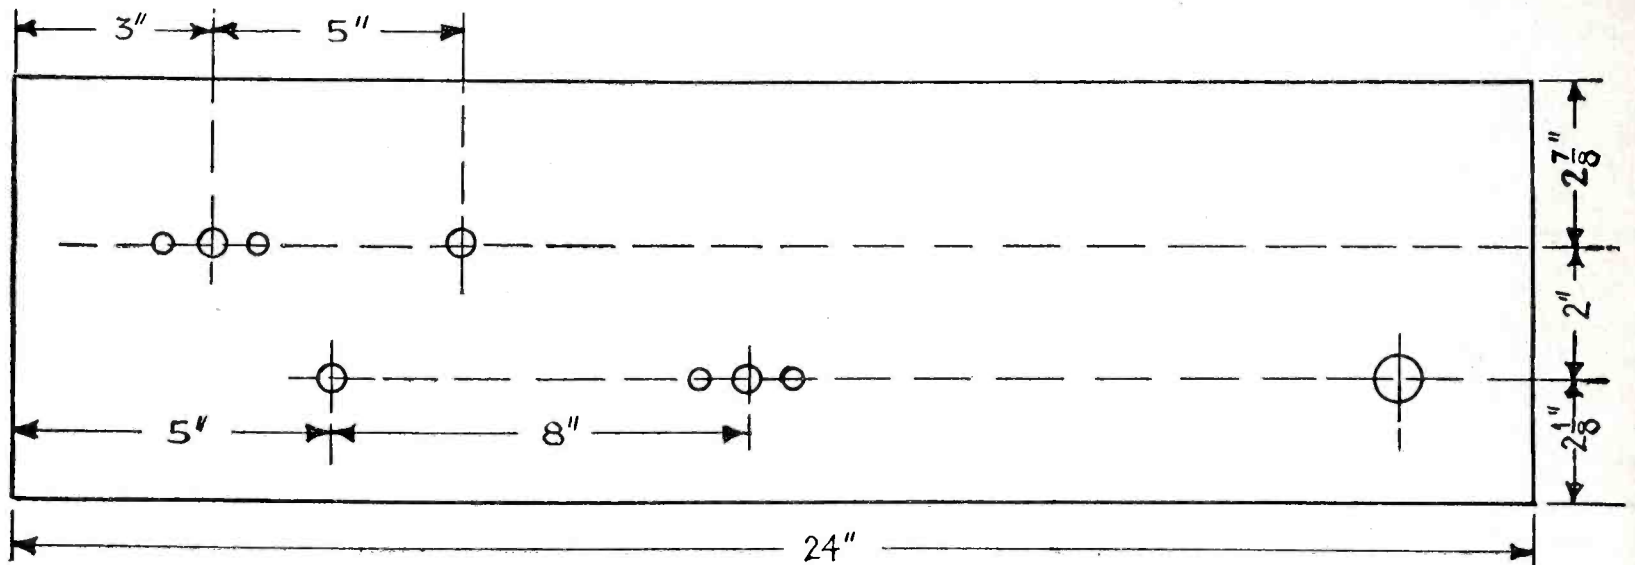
Suggestive layout for panel showing exact location of holes.
